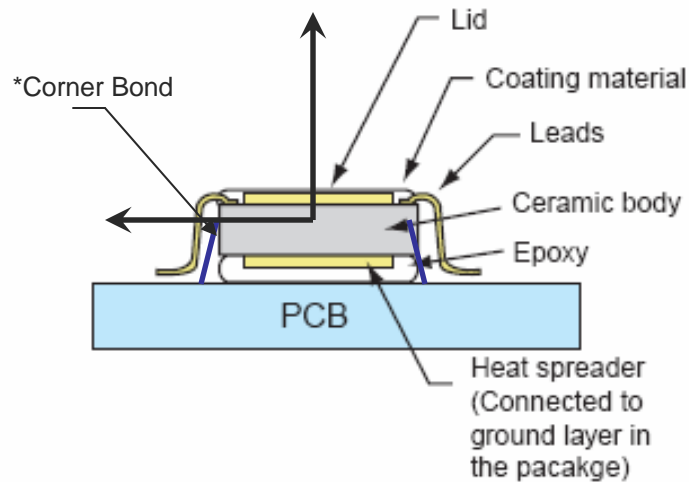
• Top Coating and Bottom Epoxy on CQ Package with Heat Sink on the Bottom
